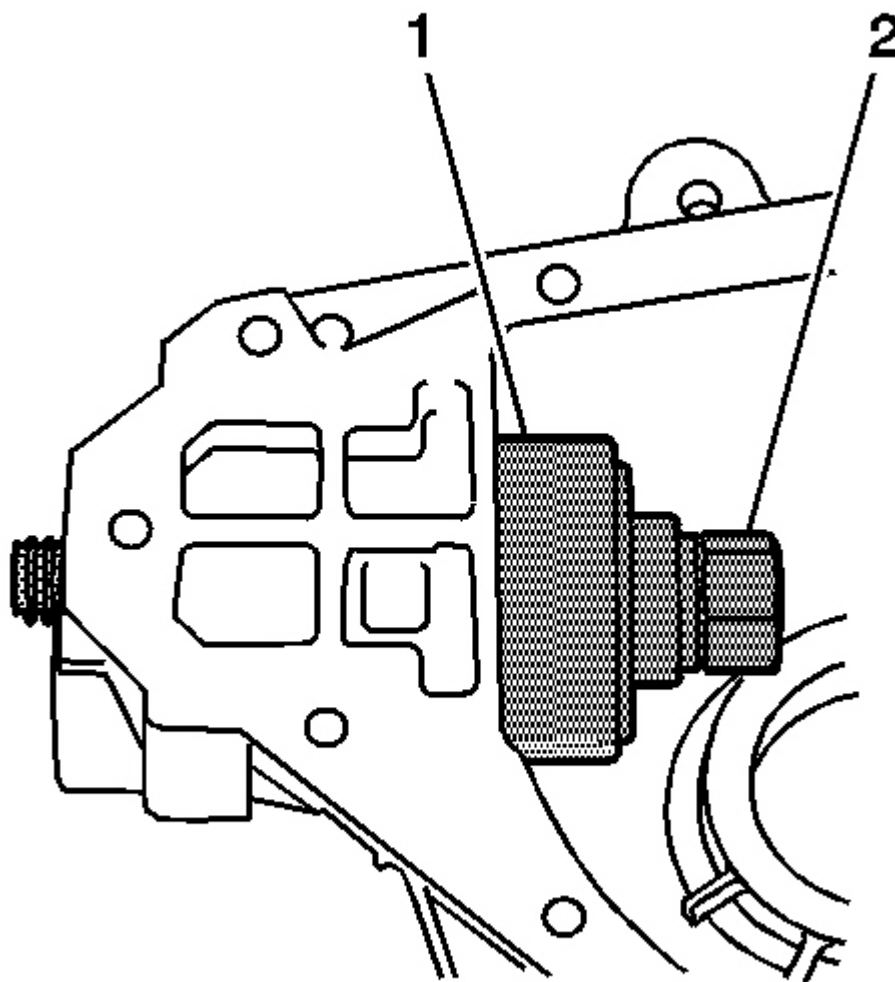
View Of J 45228-1, J 45228-5 & J 45228-4
